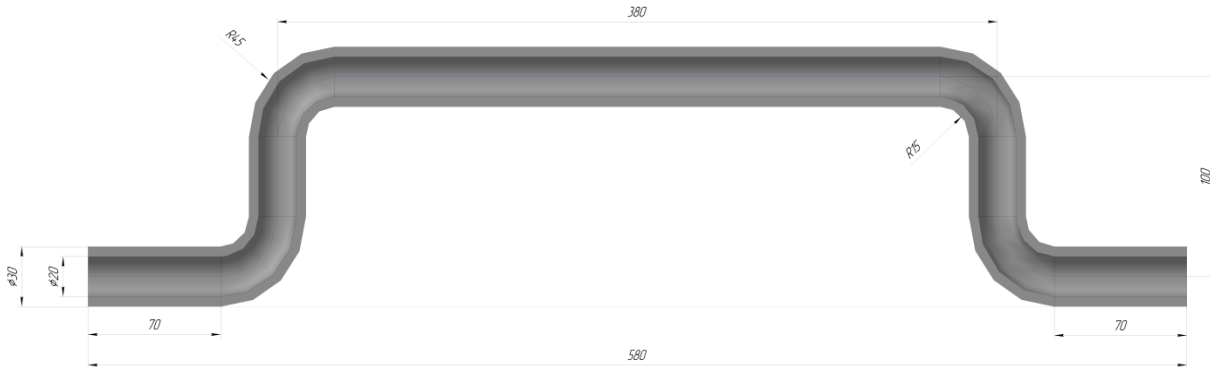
Dimensions and configuration of the solid model of the cylindrical pipeline.
